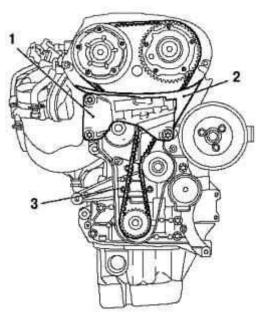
Rack-belt drive gasoline engine Z 18 XER DOHC-I: 1 - damping the engine block, 2 - toothed belt cover central, 3 - toothed belt
